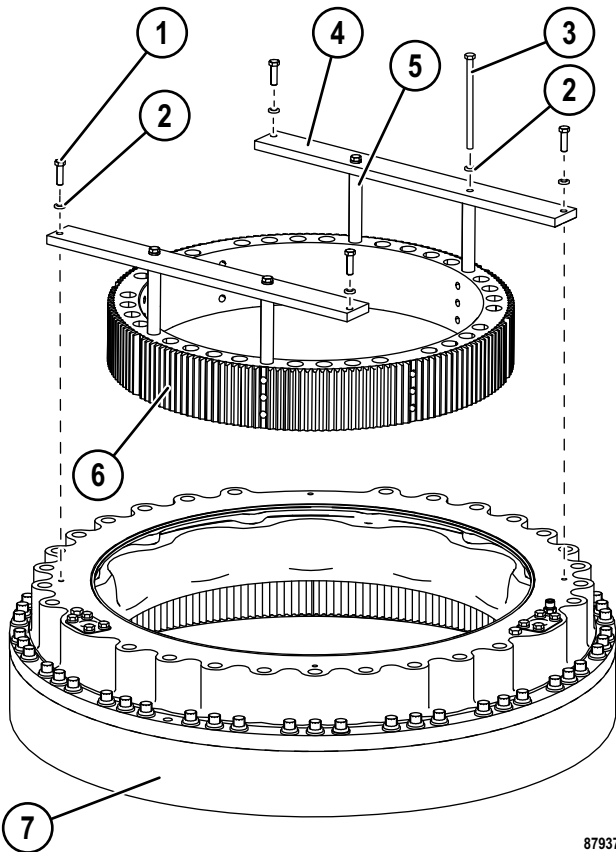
INNER GEAR REMOVAL & INSTALLATION
